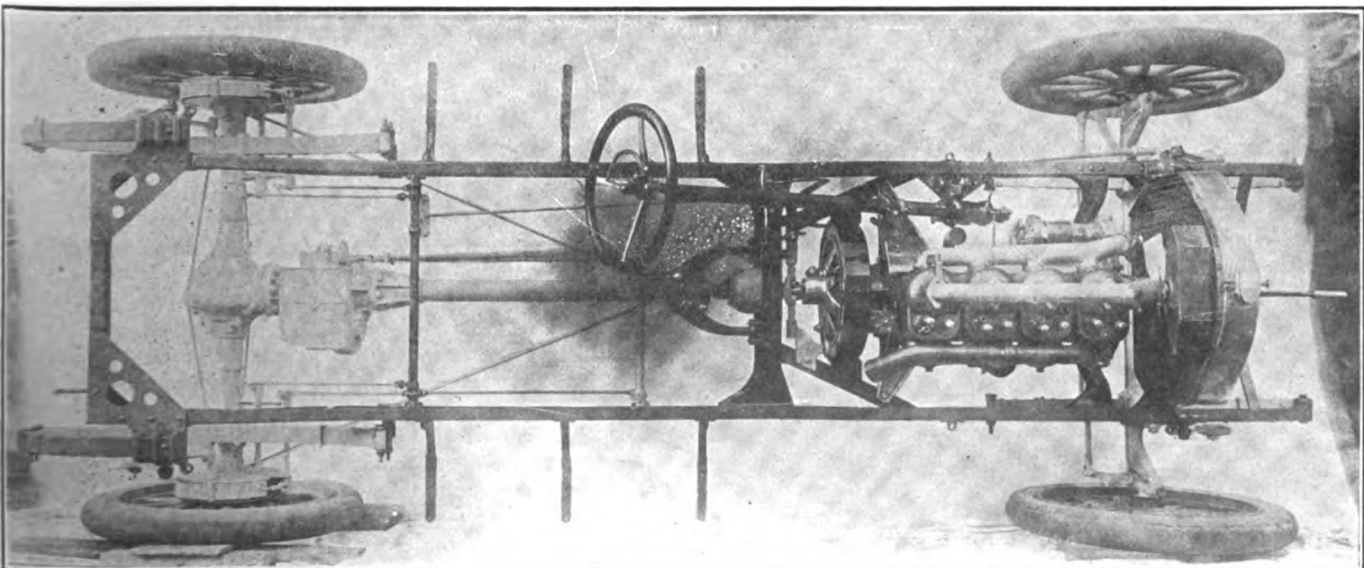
Plan of the chassis of Models 52, 53 and 54, including 35 H. P. motor, cone clutch, universal joint and unit type of live rear axle holding a three-speed selective sliding gear
